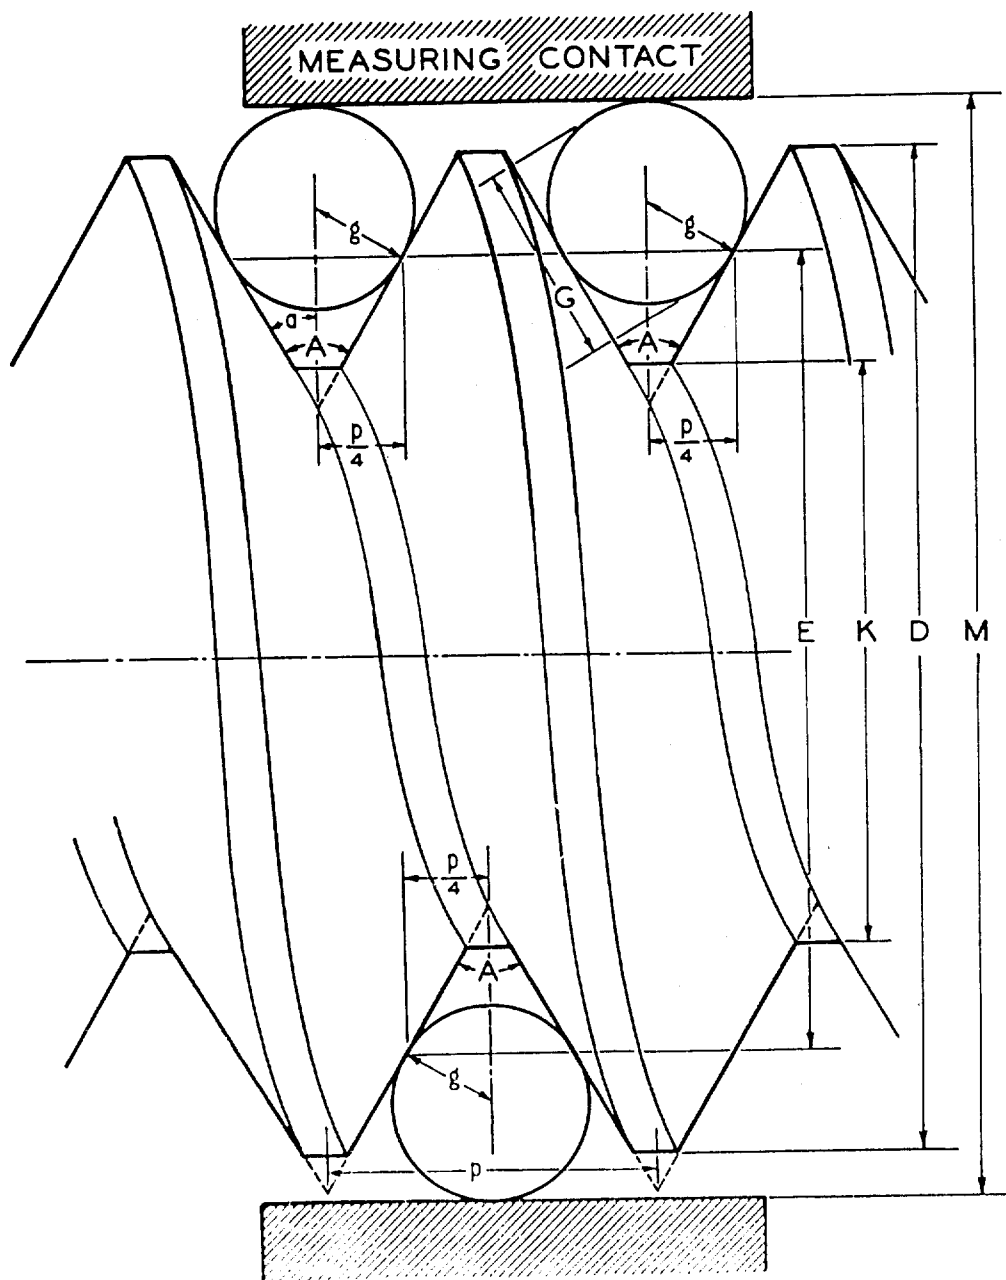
Three-wire method of measuring pitch diameter of thread plug gages.
